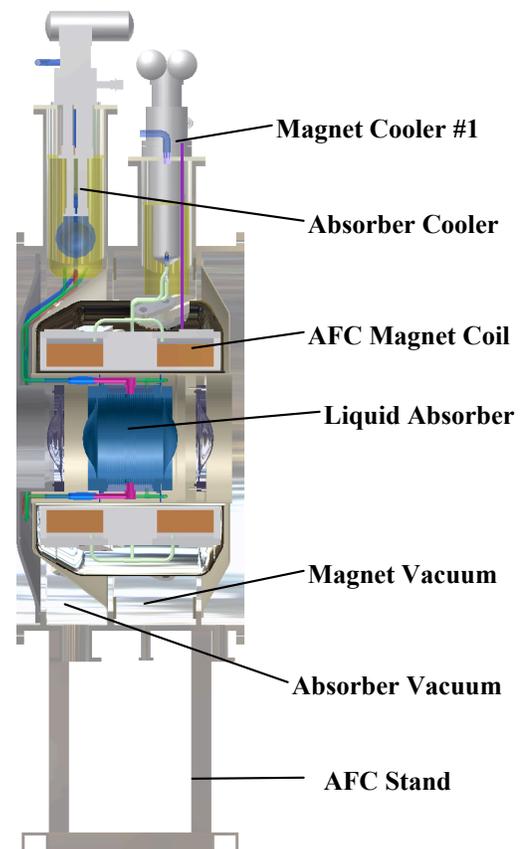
A cross-section view of the MICE AFC module showing the magnet coils, the liquid absorber, the cryostat vacuum vessel and the coolers.
